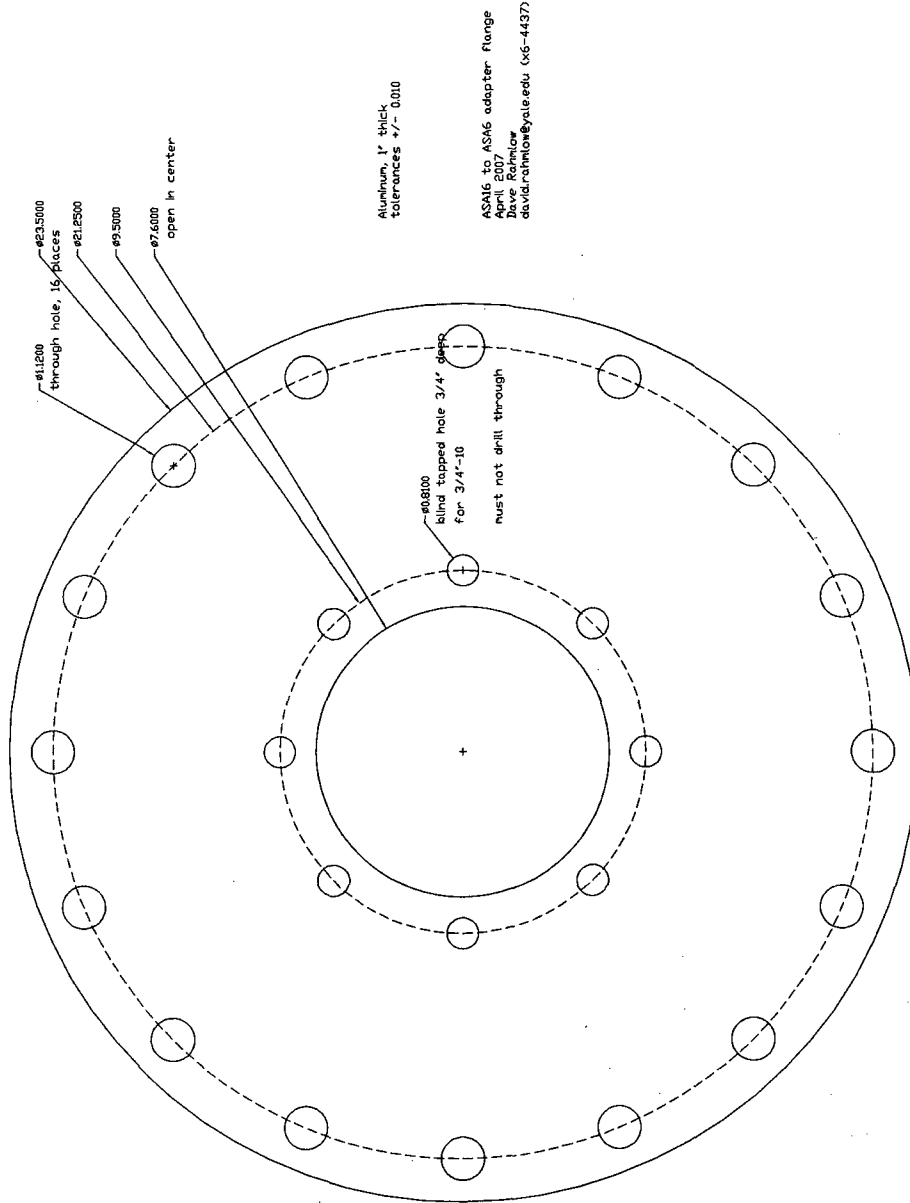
ASA16 to ASA6 adapter flange, used to hold a 6" gate valve on chamber 1.
